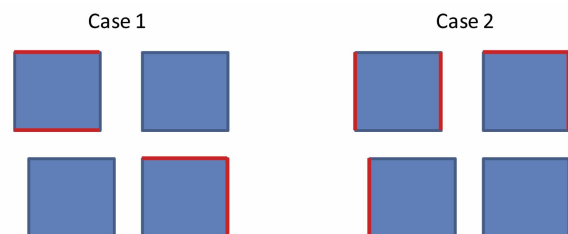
Two cases of weld defects where red lines represent complete loss of weld integrity (non welded regions).
